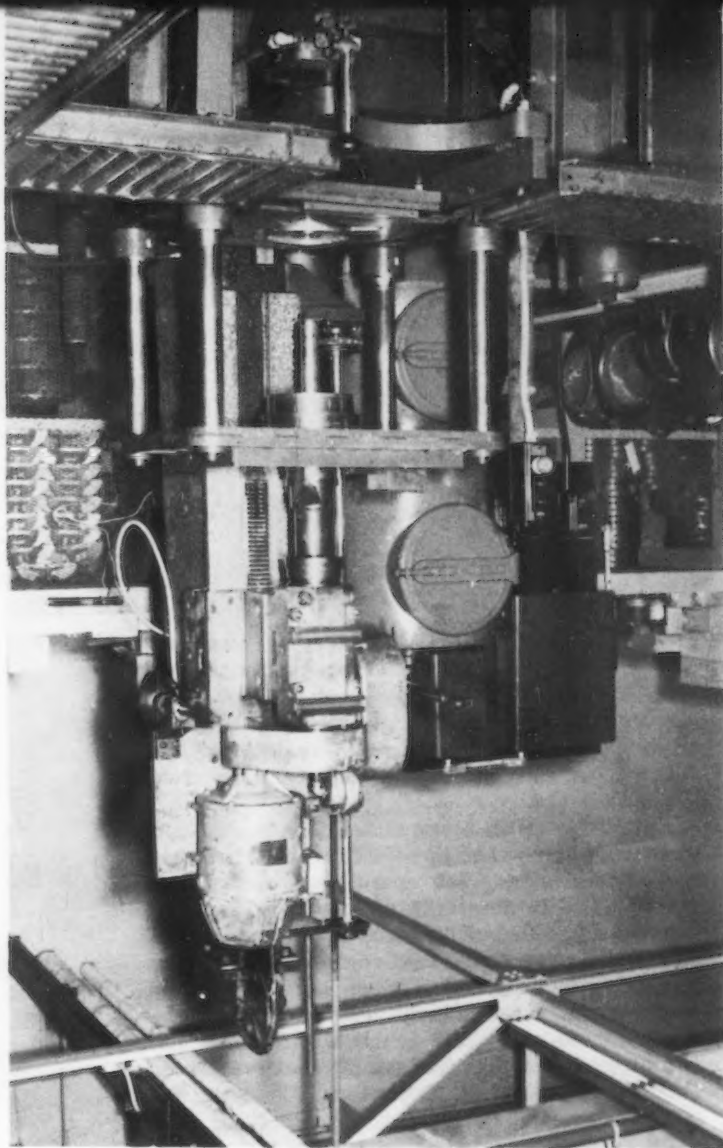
Boring stators of 1 to 20 hp motors was difficult until this machine was developed. It was built from a multiple-spindle drill press column, base and head, to which a precision boring spindle, a special feed motor and adjustable speed controls were added.
